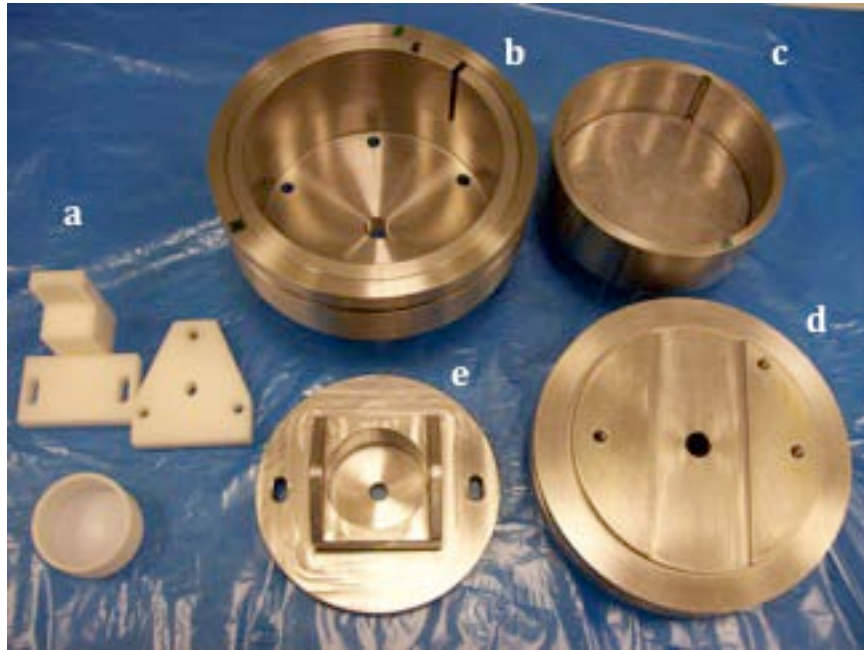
Jigs for friction simulator testing. (a) Delrin fixtures and pot. (b) Tibial base component with clamping ring in place. (c) Tibial specimen holder with flat stainless steel plate in place. (d) Femoral base component. (e) Femoral specimen holder.
